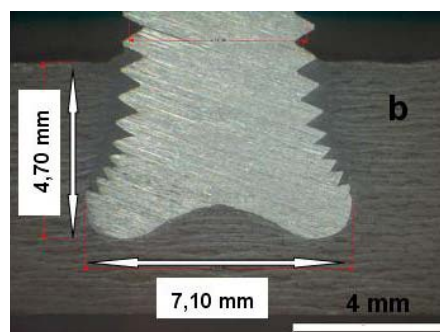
Example of a sound friction riveted joint on PEI-GF/Ti Gr.2-M5 threaded rivets (RS= 10000 rpm, FT= 700 ms, FOT= 1200 ms and FP= 6 bar FOP= 7 bar)
